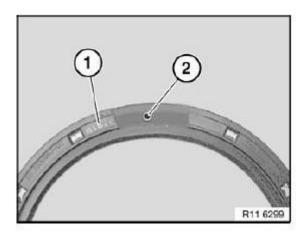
Identifying Rubber Coating & Radial Seal Courtesy of BMW OF NORTH AMERICA, INC.
